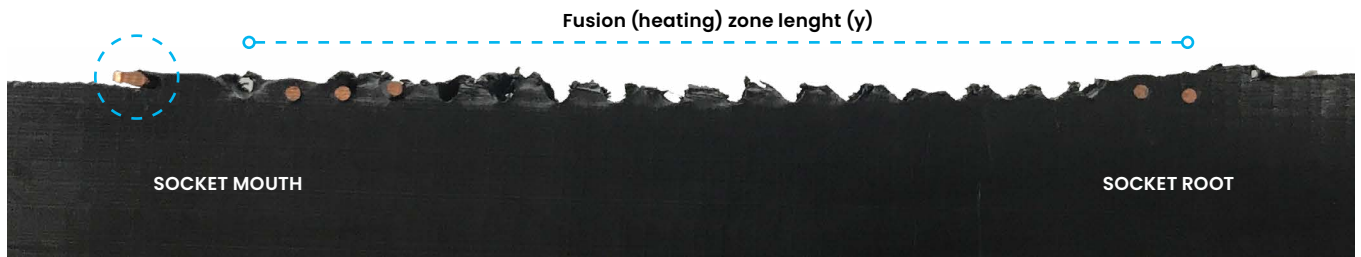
Electrofusion coupler – side view of the full fracture zone based on the close-up image shown in Figure 12.
